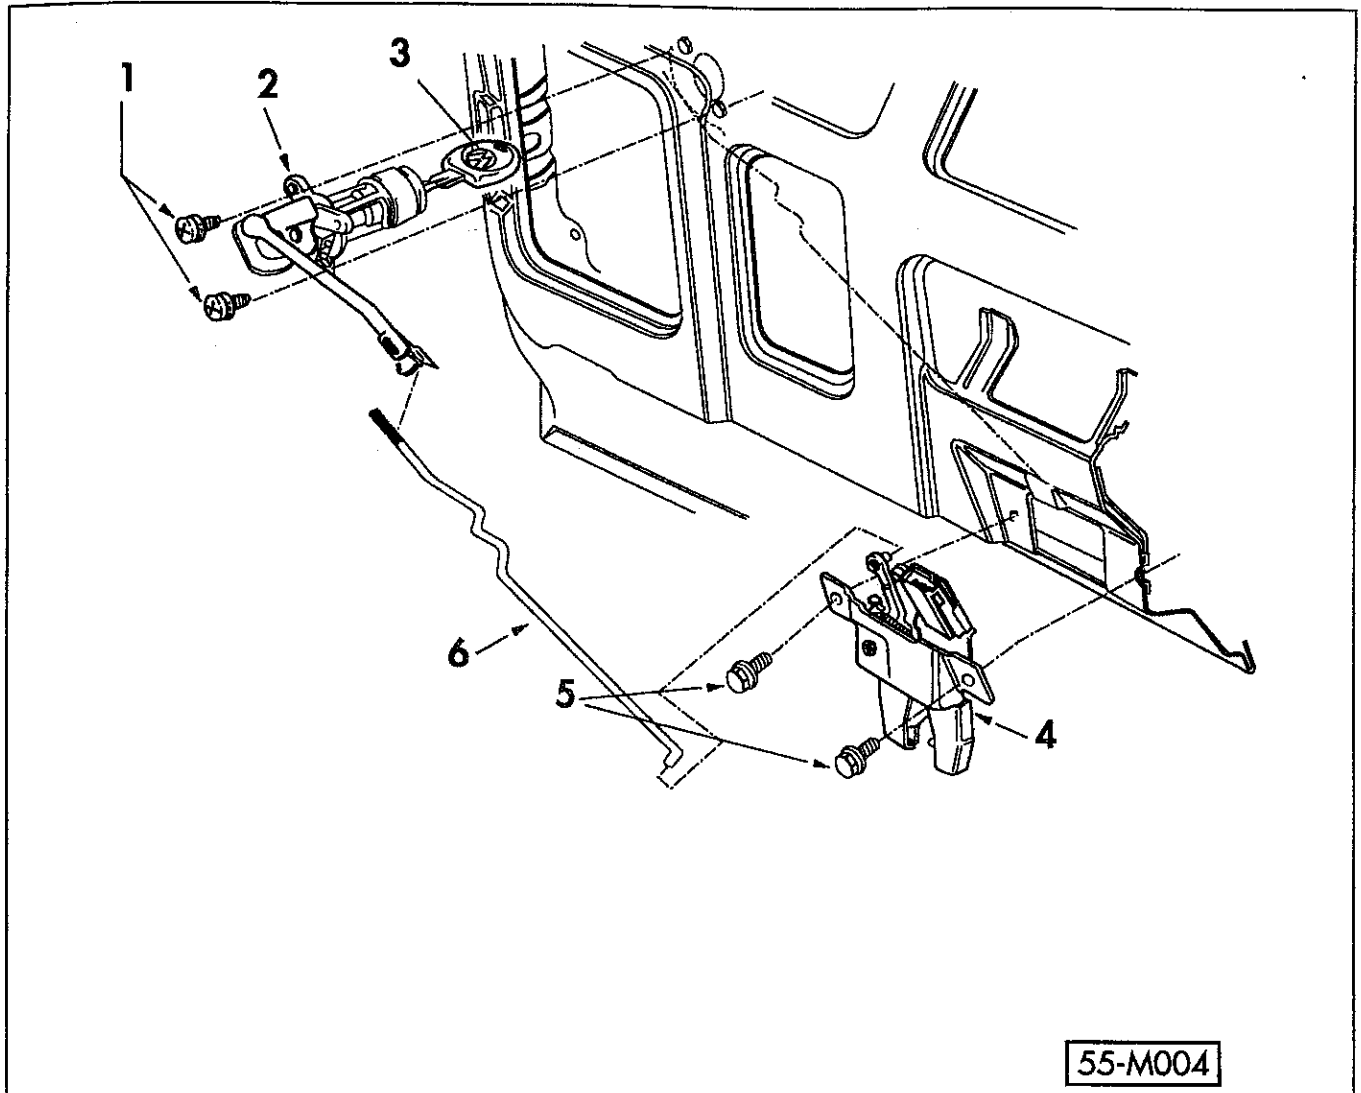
Rear lid lock mechanism. Mark location of latch (4) before loosening mounting screws.
